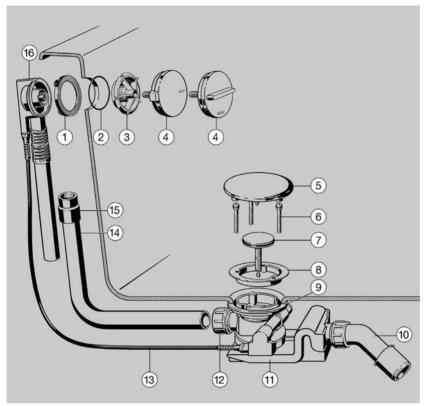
65 Components – Rotaplex Visign R5/R3
